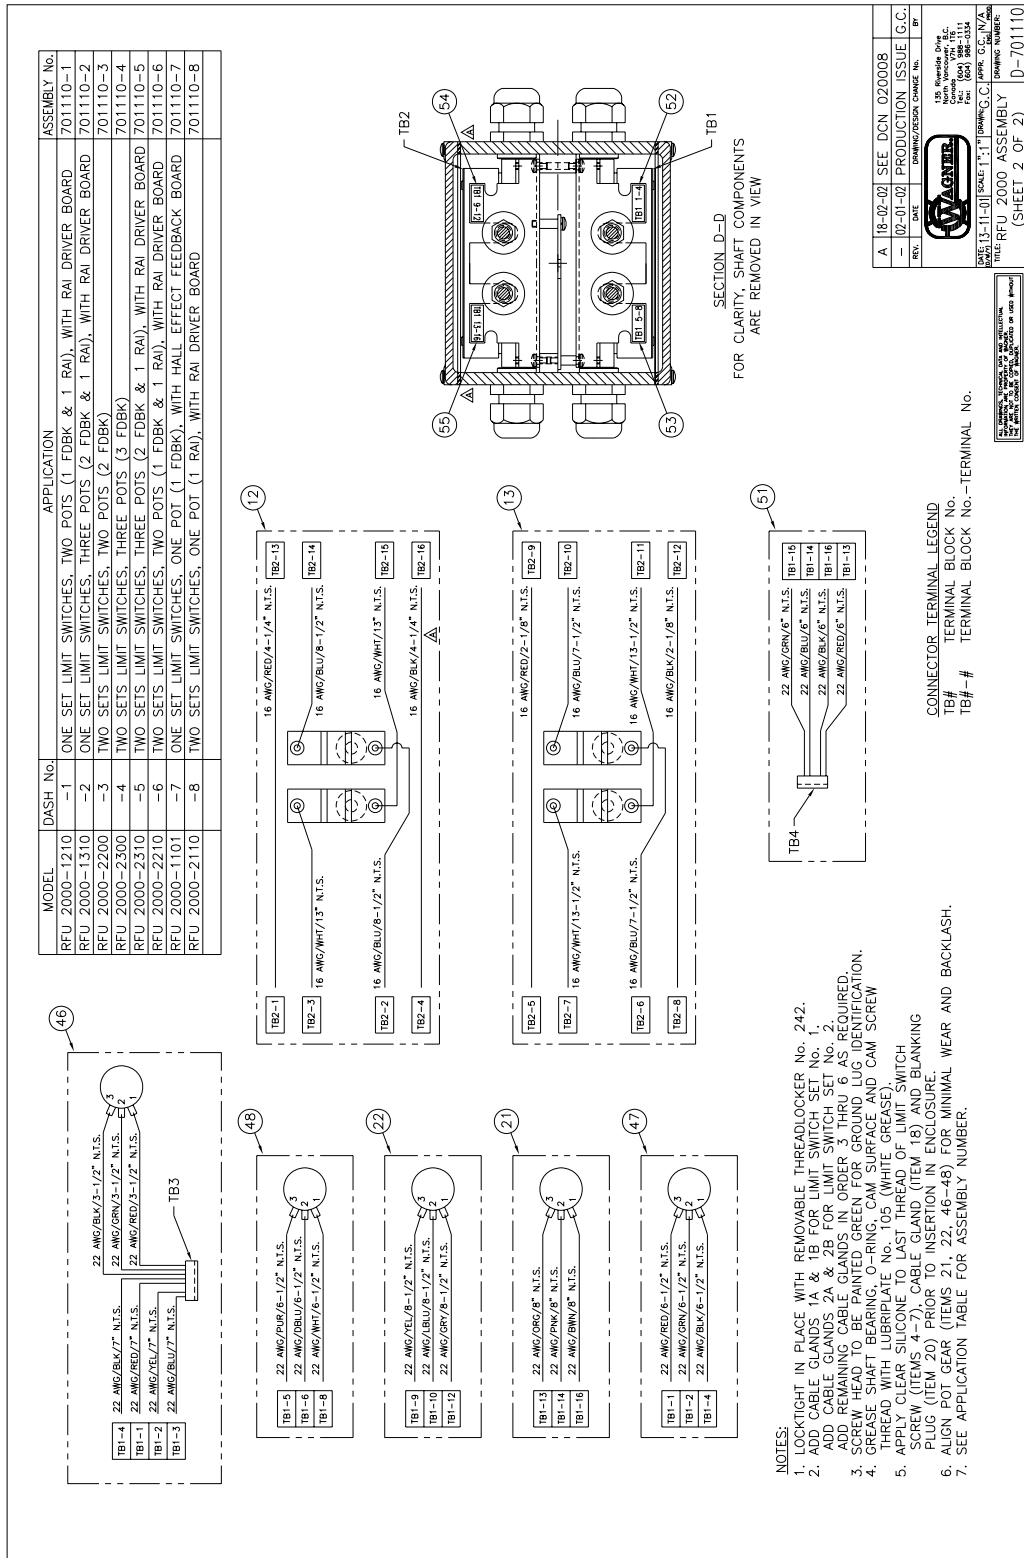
RFU 2000 Assembly and Customer Parts List (Page 1 of 2)
